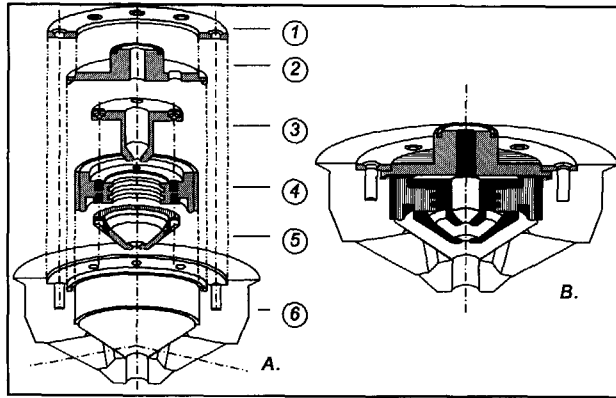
The integrated magnetic and electrostatic objective lens in exploded view and assembly. 1. cobalt-iron clamp ring, 2. vacuum lid, 3. upper electrode, 4. Macor frame, 5. middle electrode, 6 upper pole piece.
